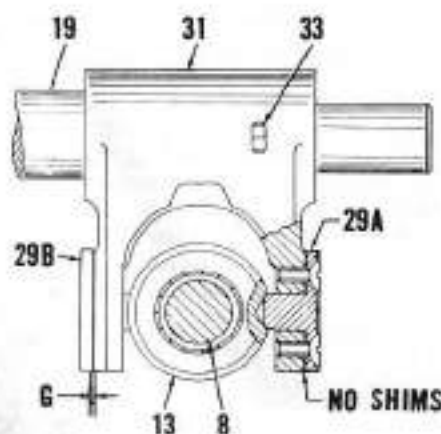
View showing method of selecting shims for ball nut peg preload. Refer to text for procedure and to Fig. 11, 12 or 13 for legend.
